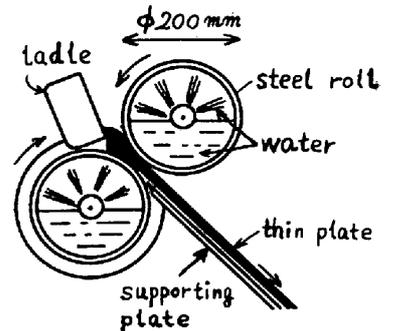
Schematic diagram of the direct-rolling casting machine.
